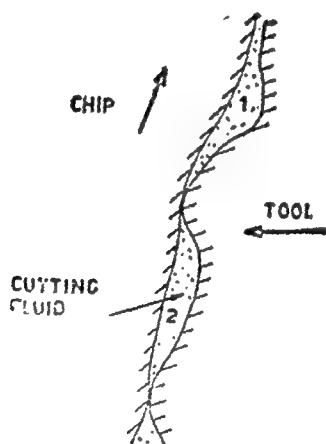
'01 Imaginary and Magnified Picture of Chip-Tool Interface
